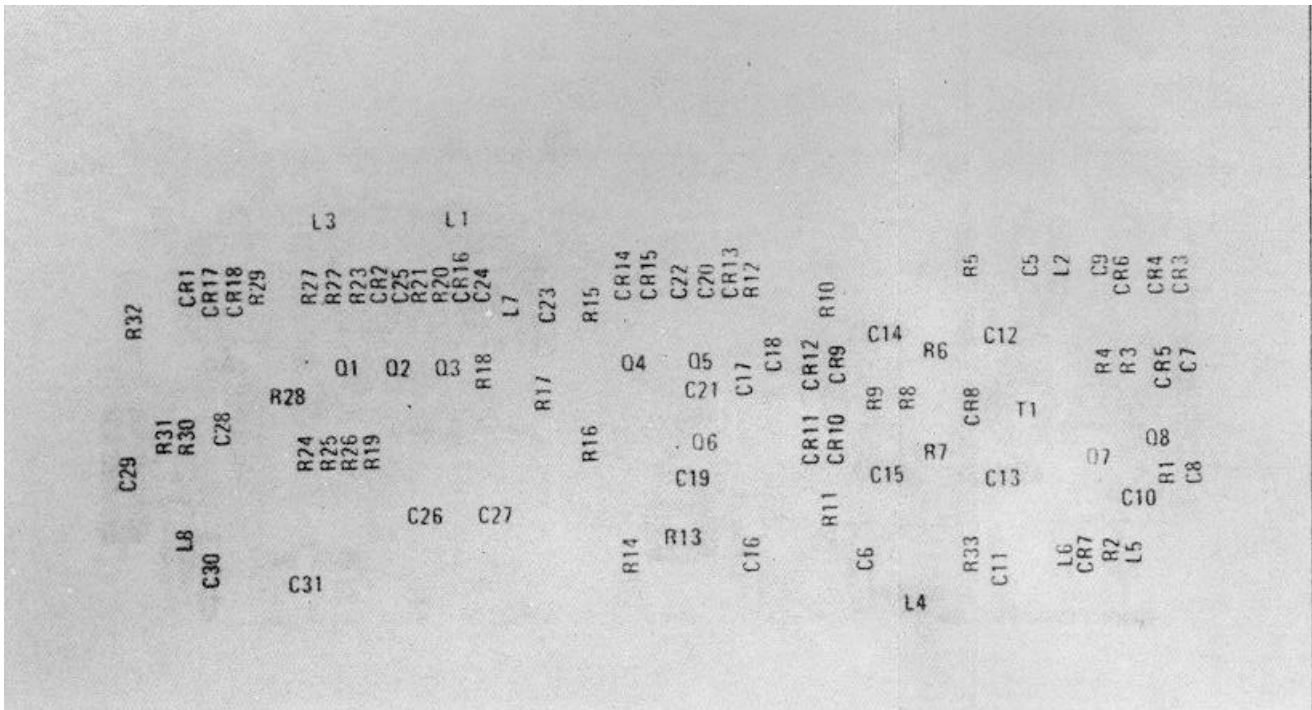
APC Assembly A6 (08553-6010) Component Locations
